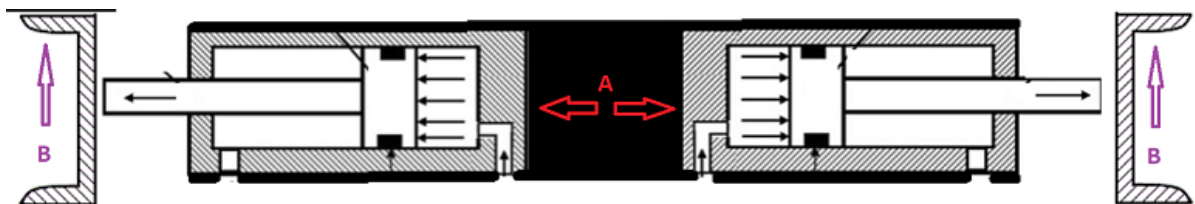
Hydraulic device arrangement with two miniature opposed hydraulic cylinder
